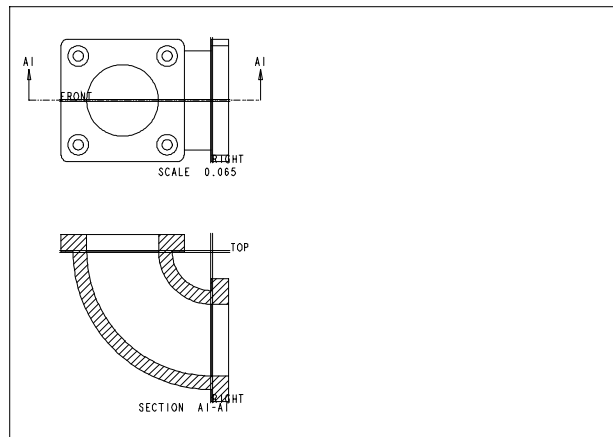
Drawing sheet after generating the top view and the sectioned front view with the display of datum planes
